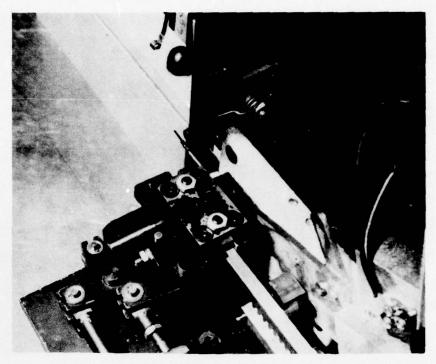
Insertion Head - Quill in Pickup Position (Back View)
